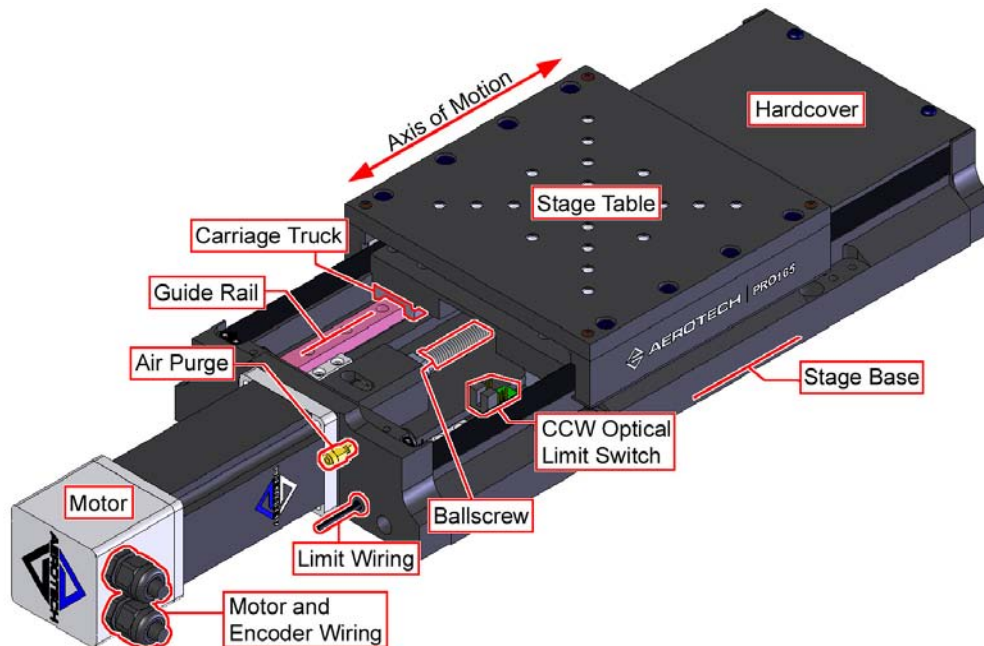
A single axis of the Cartesius-SD with Cutaway View of Ballscrew
